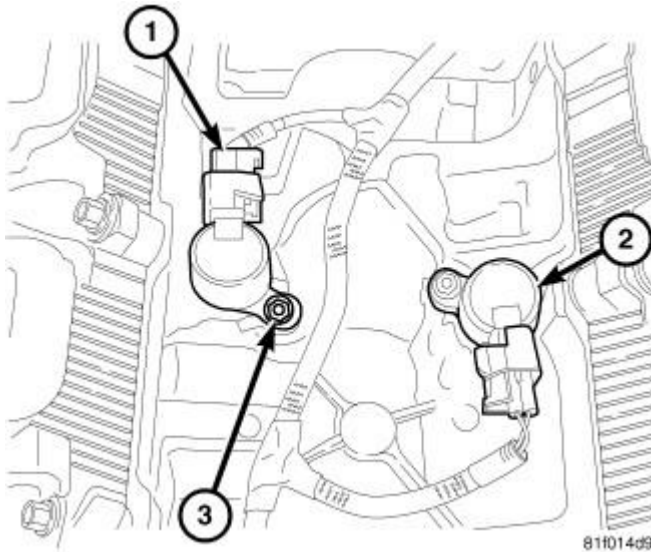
Identifying MDS Solenoid Retaining Bolt & Electrical Connector
